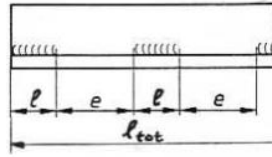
Calculation of weld forces for intermittent welds
